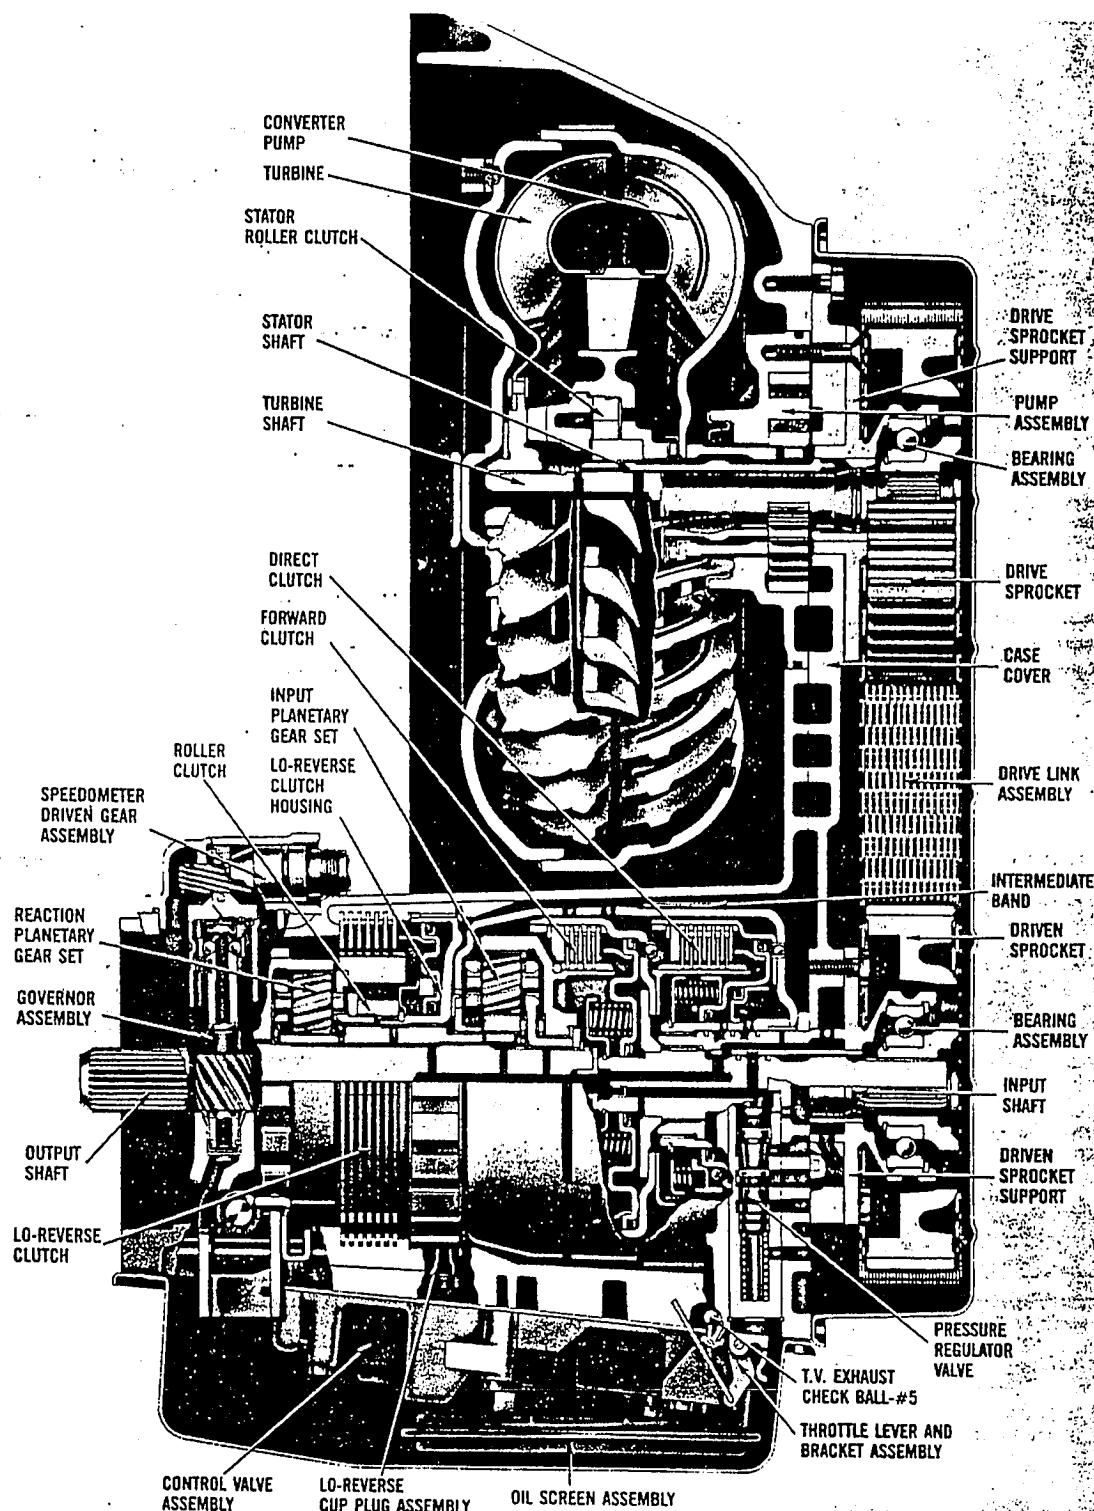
A front wheel drive automatic transmission. This three-speed unit transfers torque from turbine shaft to transmission input shaft via a drive chain. (Oldsmobile)
